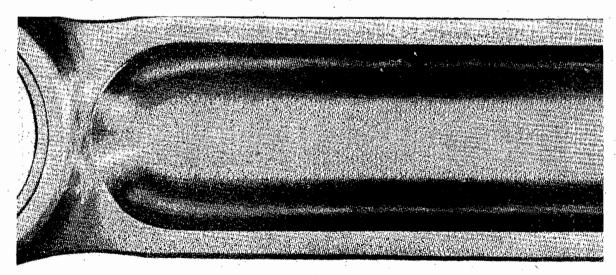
Unacceptable Rust Pitting in Channel Section of Linkrod
